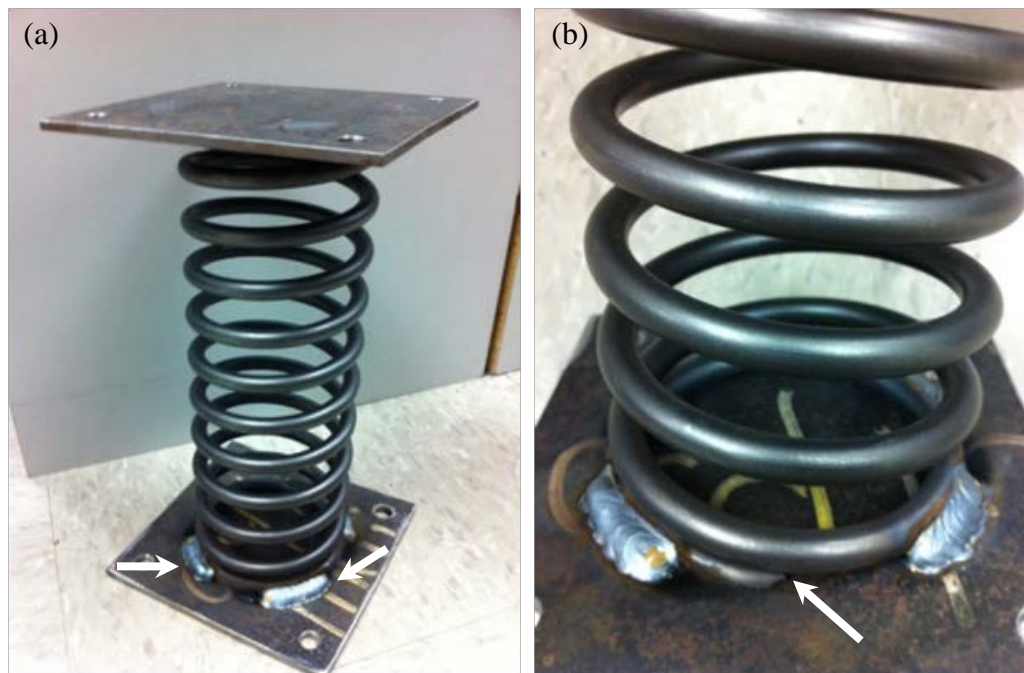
(a) Spring welded (welds indicated by arrows) to mounting plates (b) Close-up view of spring mounted showing ground spring end centered on the plate
